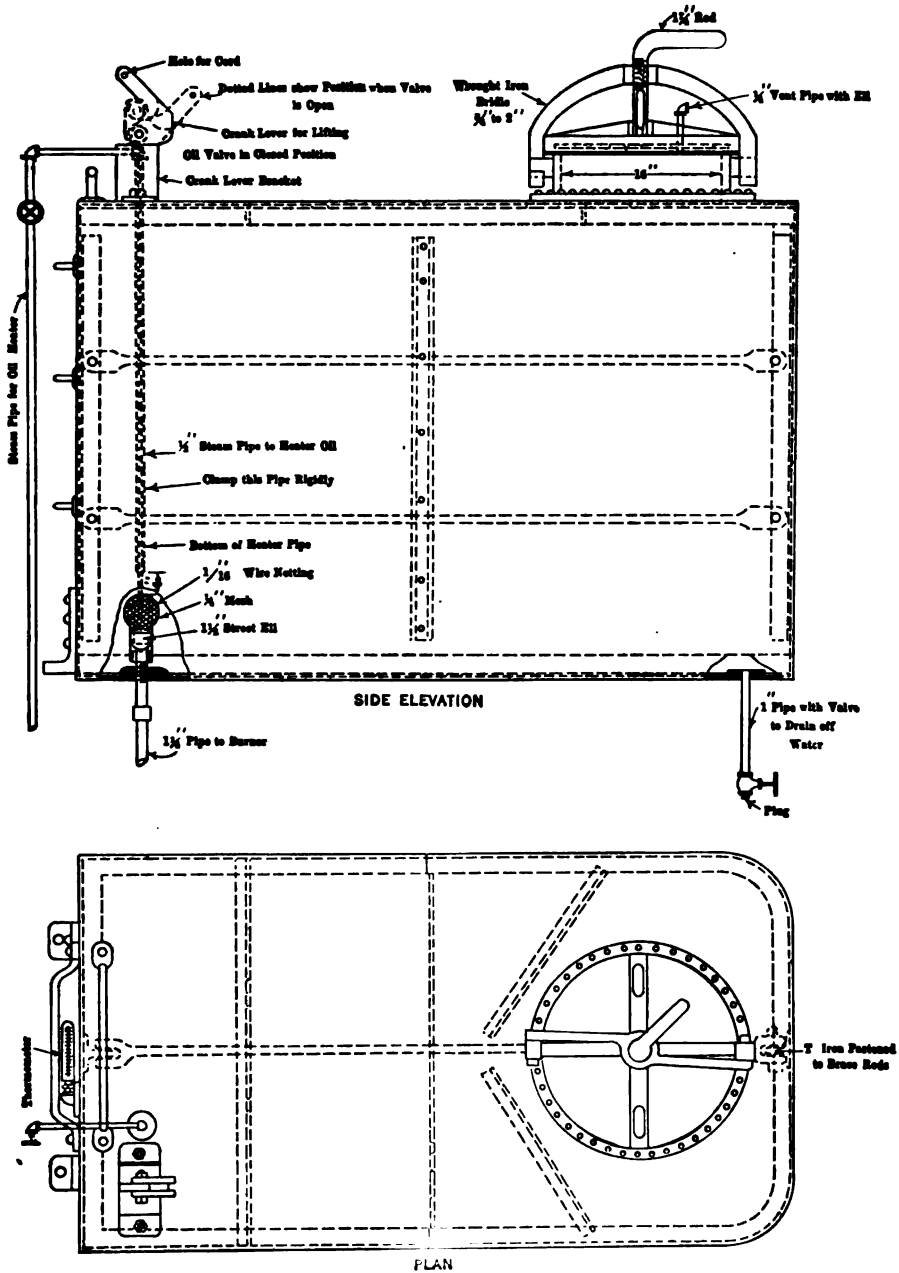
Modern oil tank used for carrying oil in the tender of locomotive.
